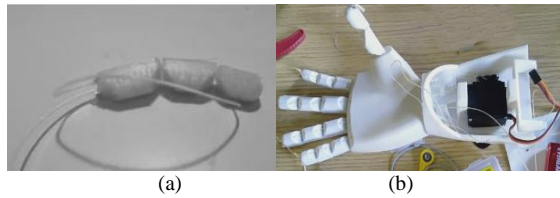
Assembly of Fingers Parts, Palm, Lower Arm
